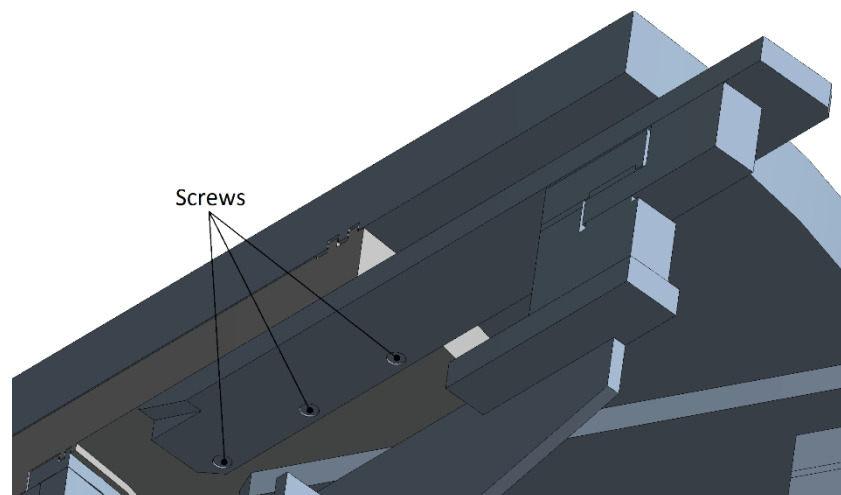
Bolted connection between the support and the rotary table of the Transfer Machine with 15 divisions.
